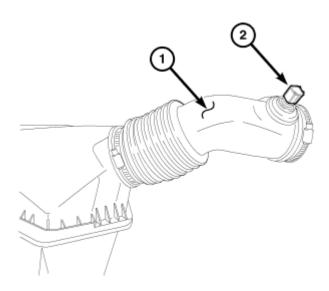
PCV Valve Location 3.8L Courtesy of CHRYSLER LLC
